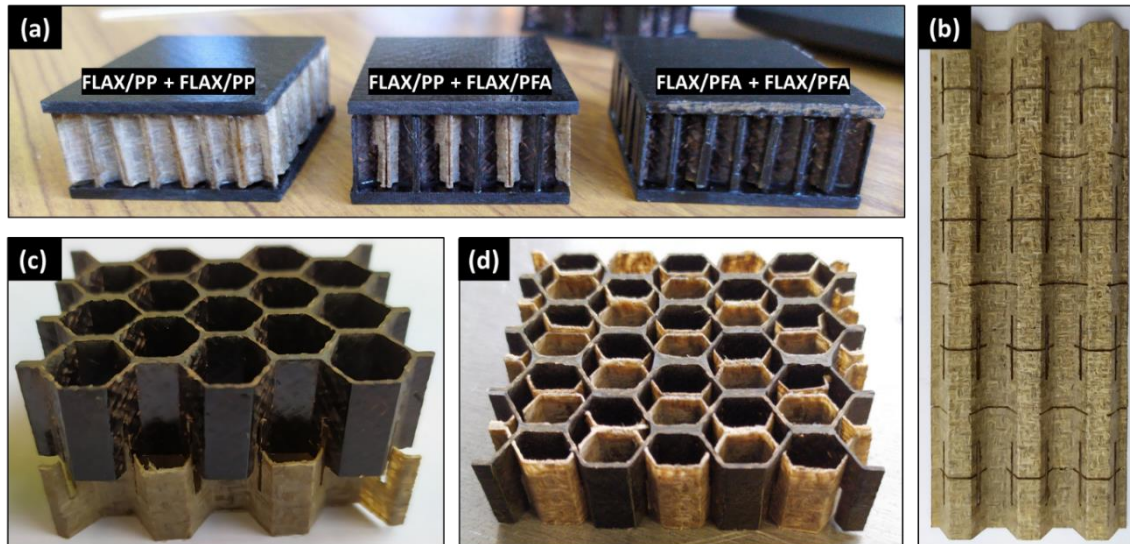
(a) Interlock manufactured samples, (b) Laser cut corrugated sheet, (c) and (d) interlocked cores
